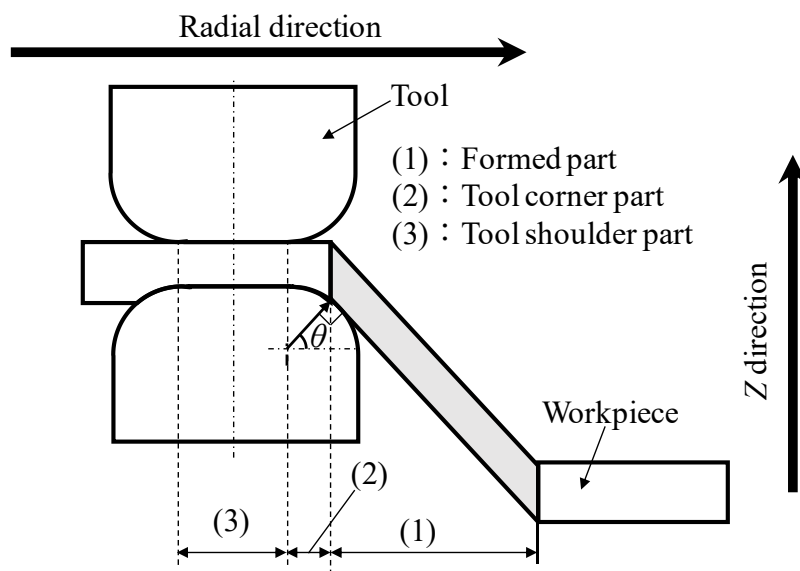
Schematic illustration of different parts in the formed sheet with considering tool size.
